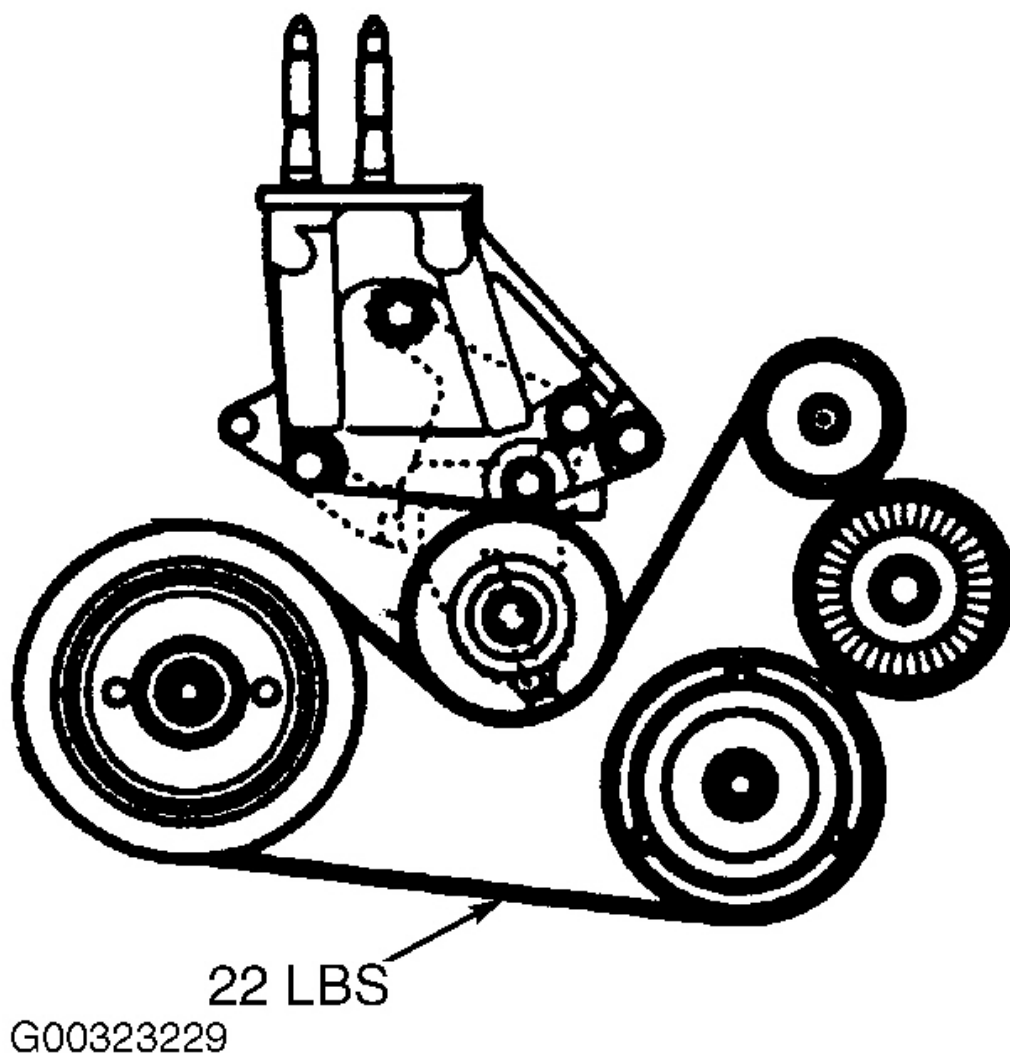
Identifying Belt Routing & Measuring Drive Belt Deflection
